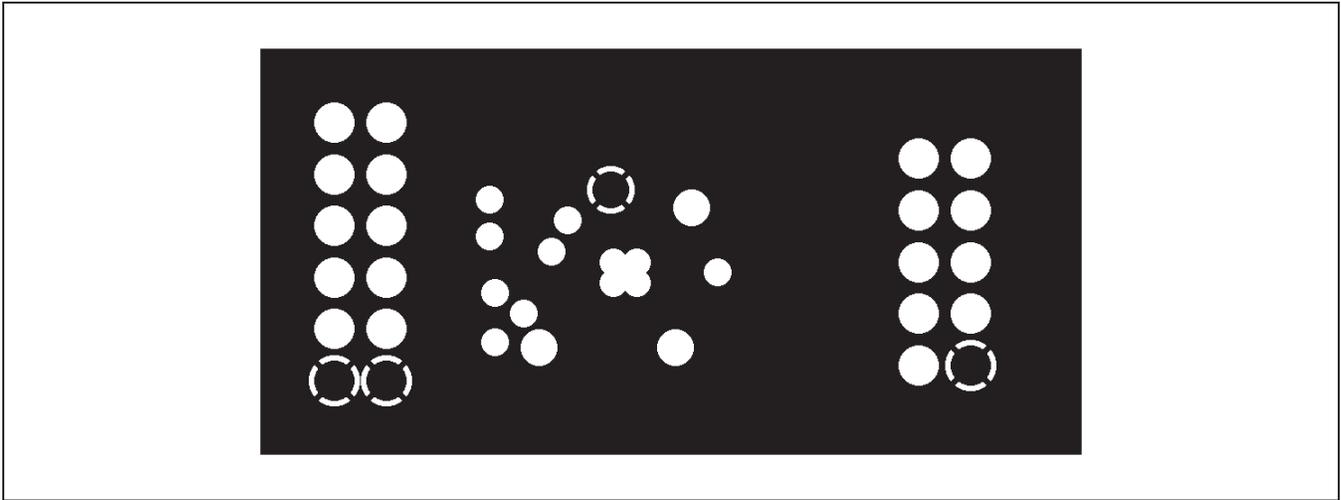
MAX4824PMB1 Peripheral Module PCB Layout—Inner Layer 2 (Power)
